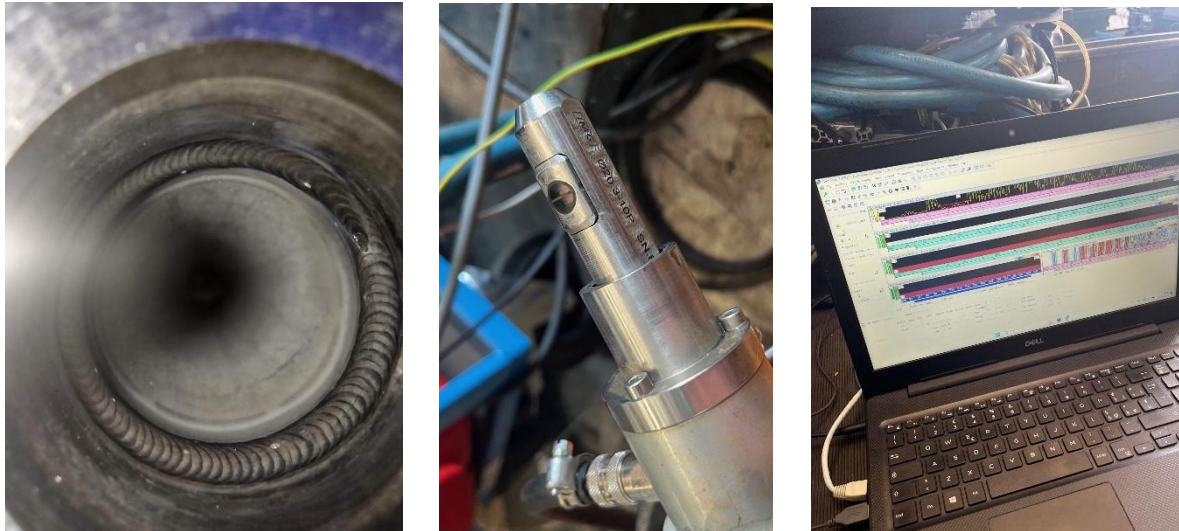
UT scanning sleeve weld; left: IBW weld of sleeve, middle: UT probe, right: UT c-scan.
